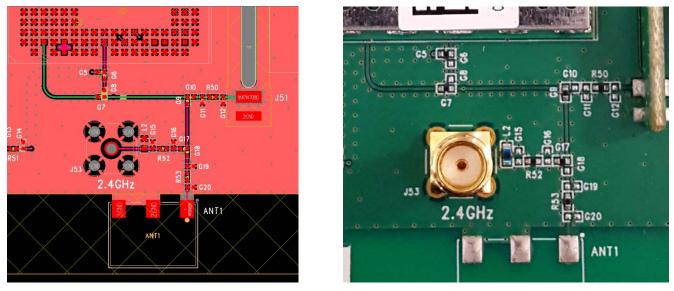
FCC and ISED approved trace design layout and picture for the M antenna of section 4.2.1
